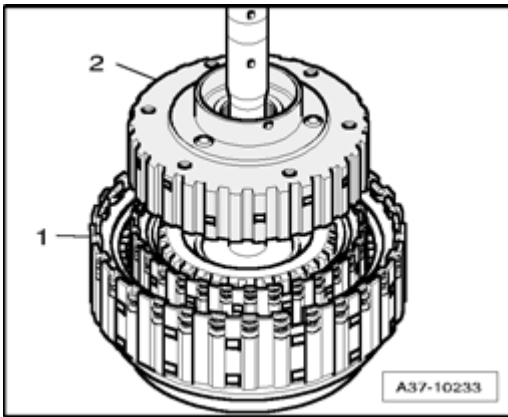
Inner Plate Carrier "B" And Clutch "A/B"
